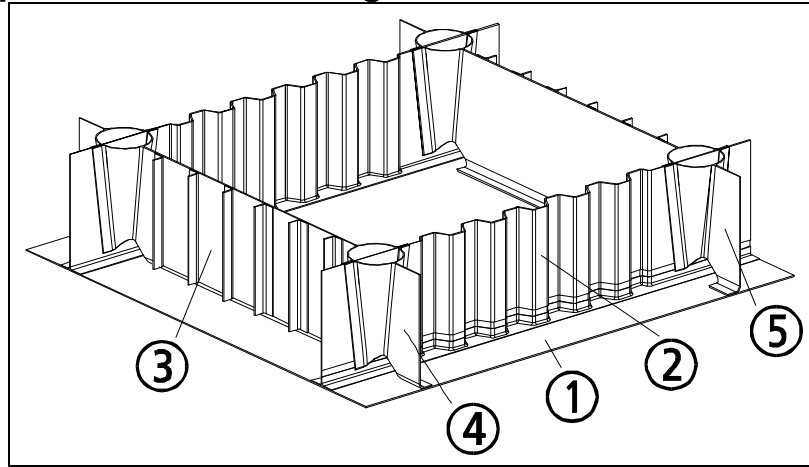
Sub-floor section designs comprising HTP- and HCP-cruciforms
